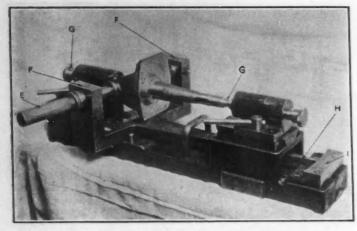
Fixture for Inspecting the Steering-Knuckle
